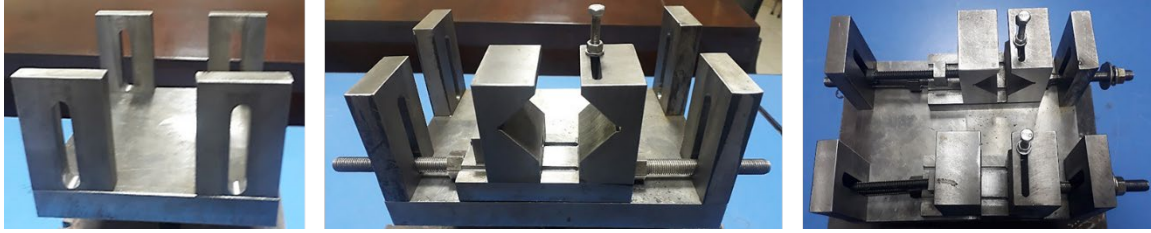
Side pillars sliding assemblies (SPSAs); Side pillars mounted over the plate, one LSA, and two LSAs.
